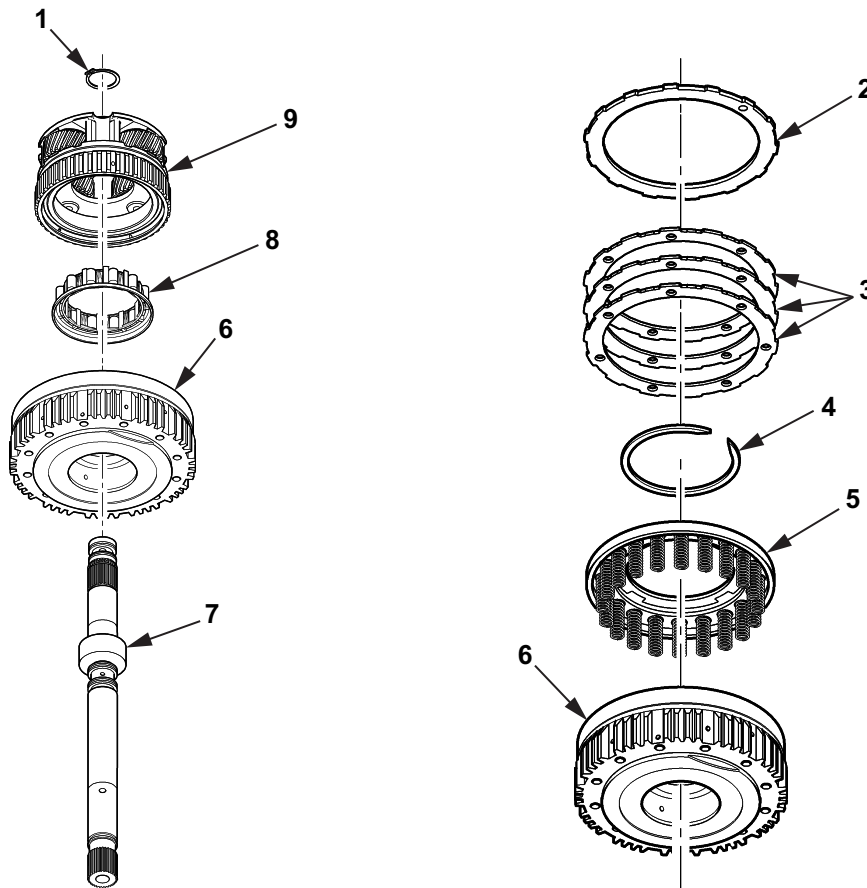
Turbine Shaft/Overrun Clutch Inspection.
